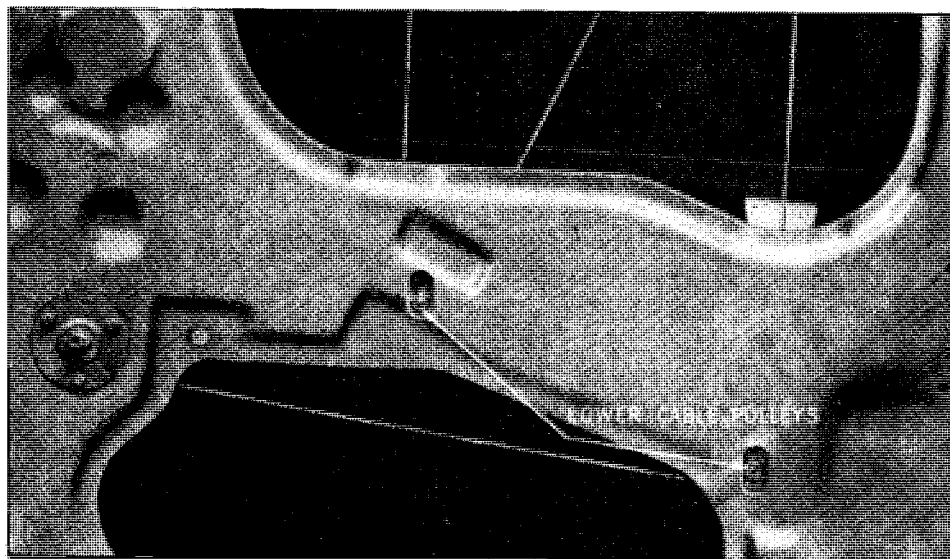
Showing the elongated holes to which the lower cable pulleys are located.
